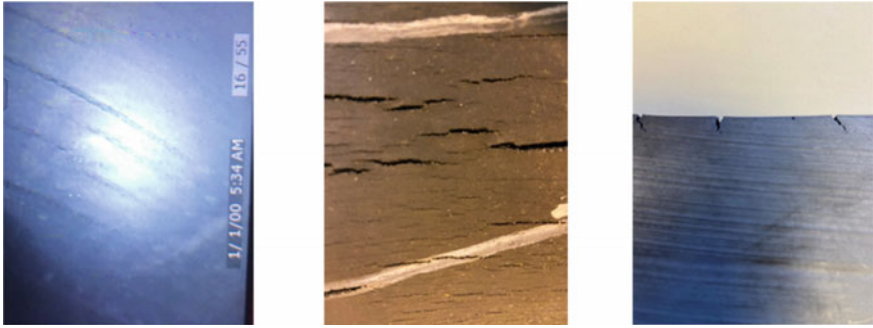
Images of ID cracks in header pipe. a Radiograph, b ID surface view, and c Cross-section
